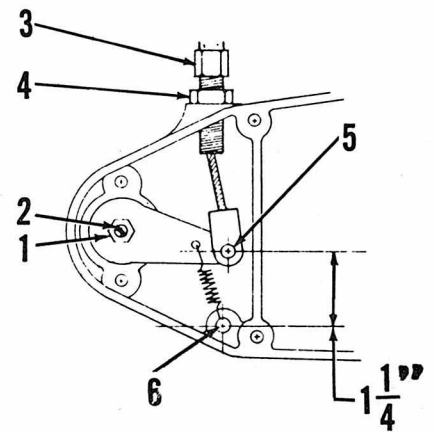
Clutch adjustment points are shown. Adjustment is usually accomplished at cable adjuster (4).
